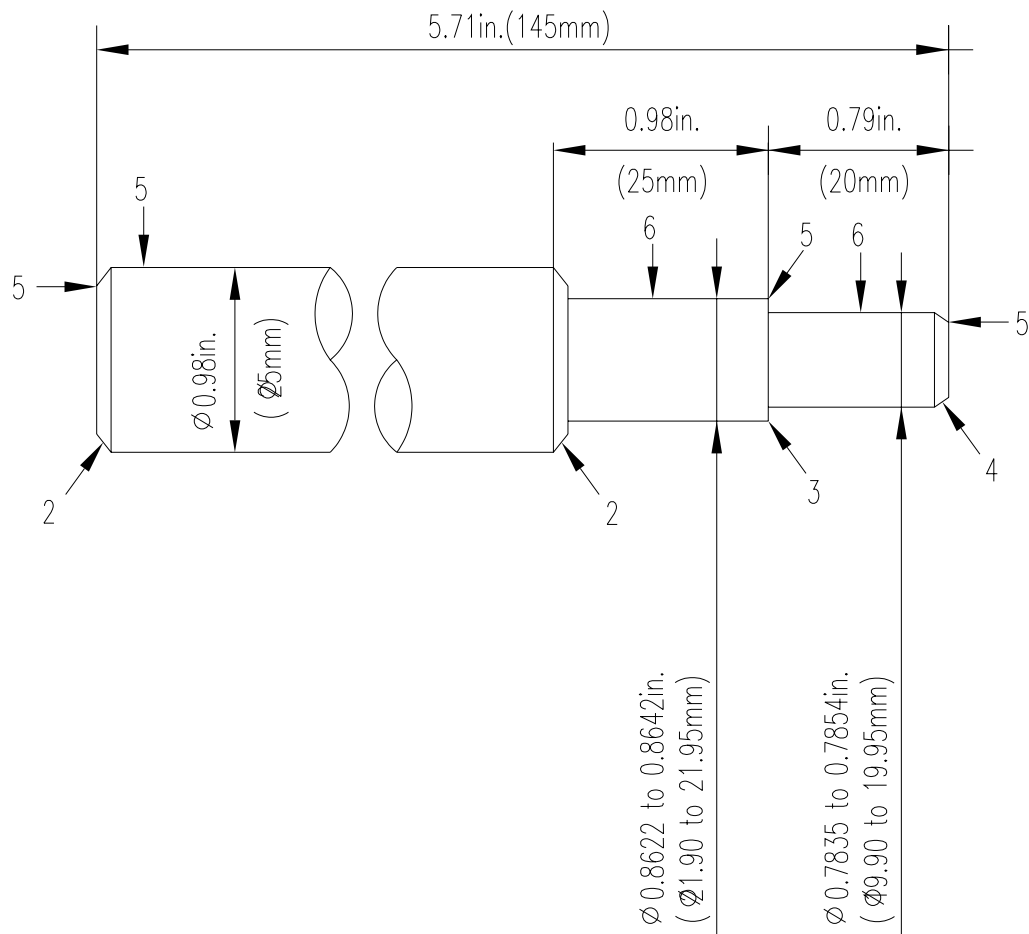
Crankshaft Bearing 1 Replacing Tool
